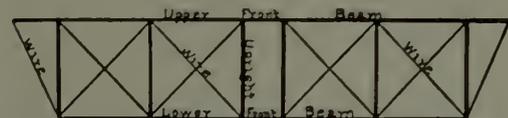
Front elevation, giving arrangement of wiring and uprights
